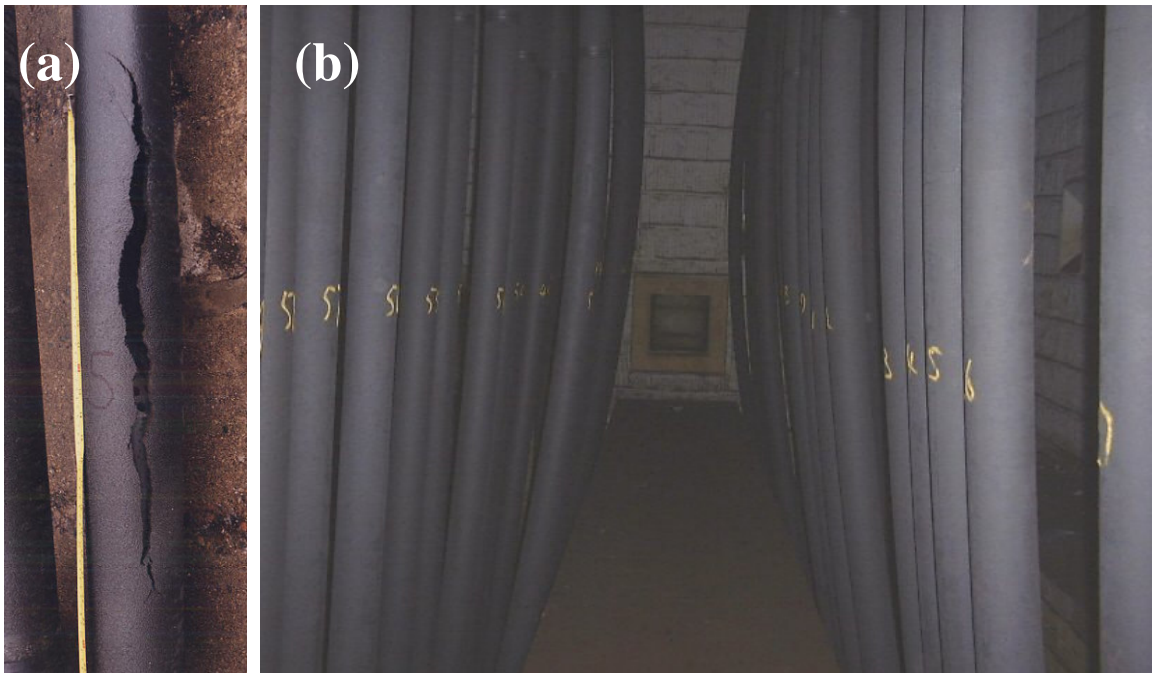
Photographs of consequences of poor heat transfer on primary steam reformer tubes: (a) showing the cracked tube and (b) showing the bent tubes. Source: Johnson Matthey Catalysts.
